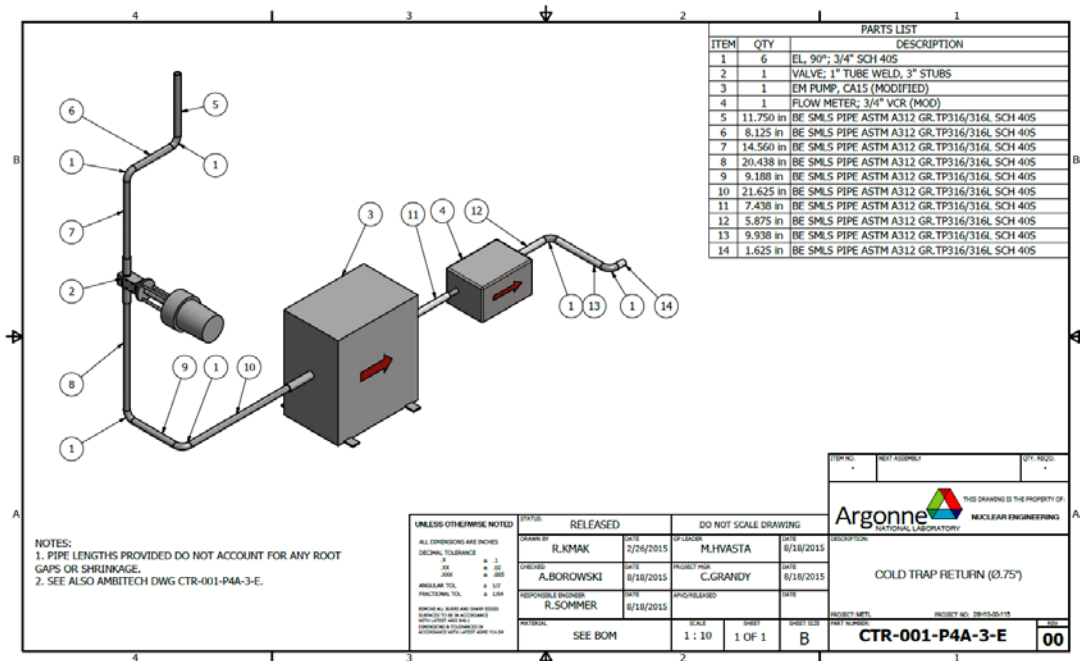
A sample piping ISO produced by ANL. This updated ISO is based on Ambitech drawings but gives Central Shops the required dimensions of the piping and equipment prior to installation.
